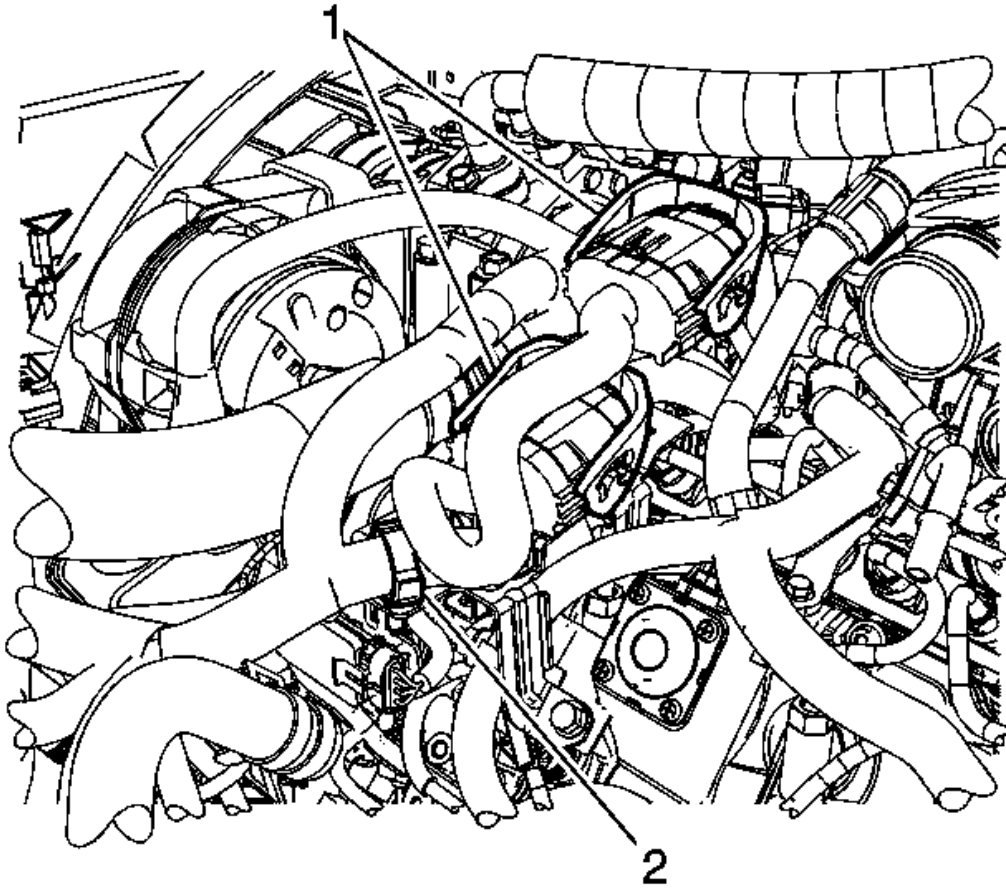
View Of Main Engine Electrical Harness Connectors & Latches
